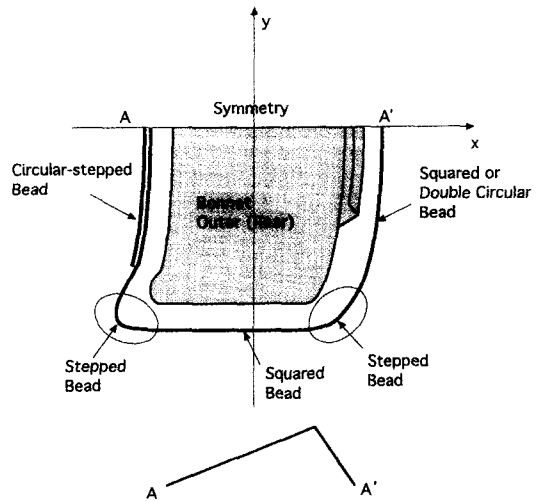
Schematic diagram of drawbeads in bonnet outer draw panel (rear)
